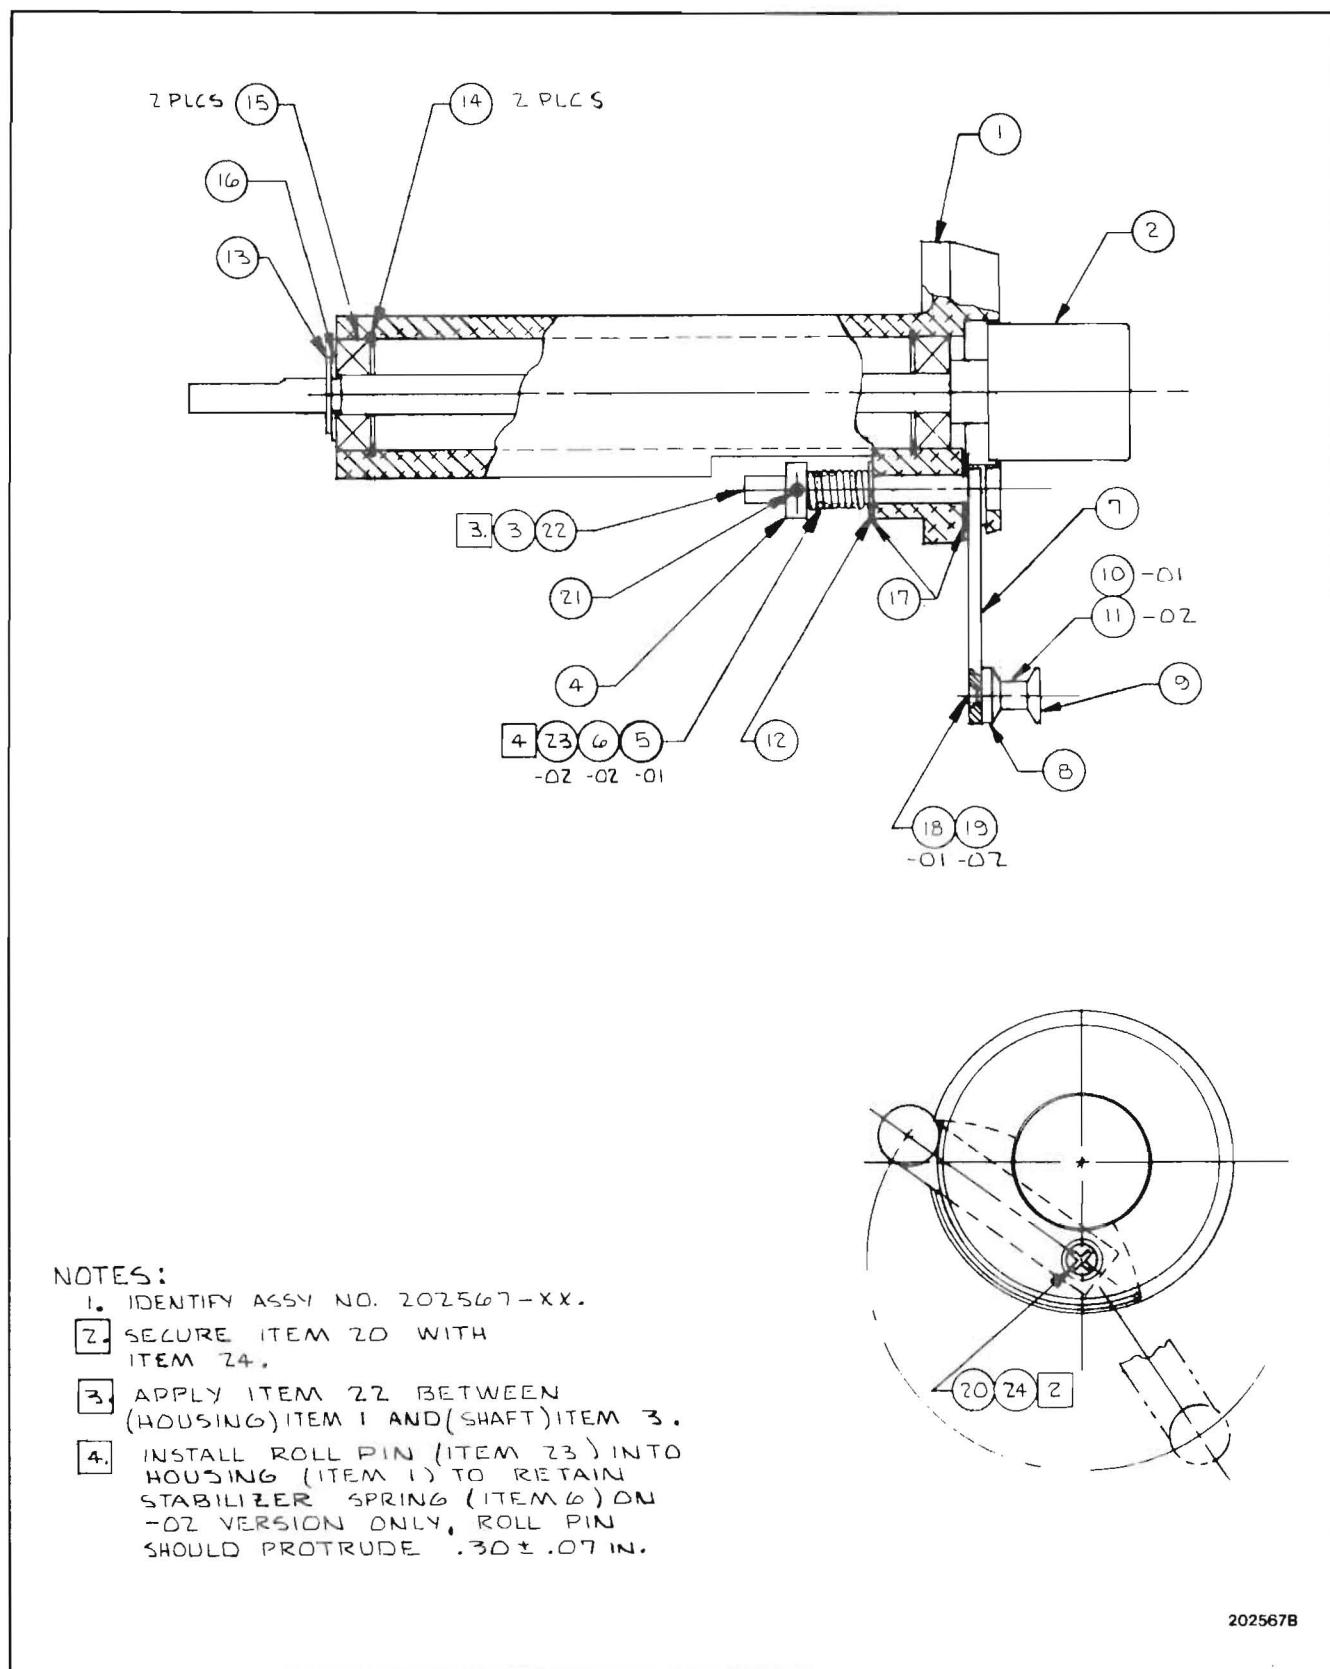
Reel Stabilizer Assembly, 0.25 Tape
